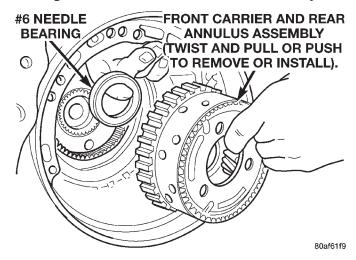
Remove Front Carrier and Rear Annulus Assembly
